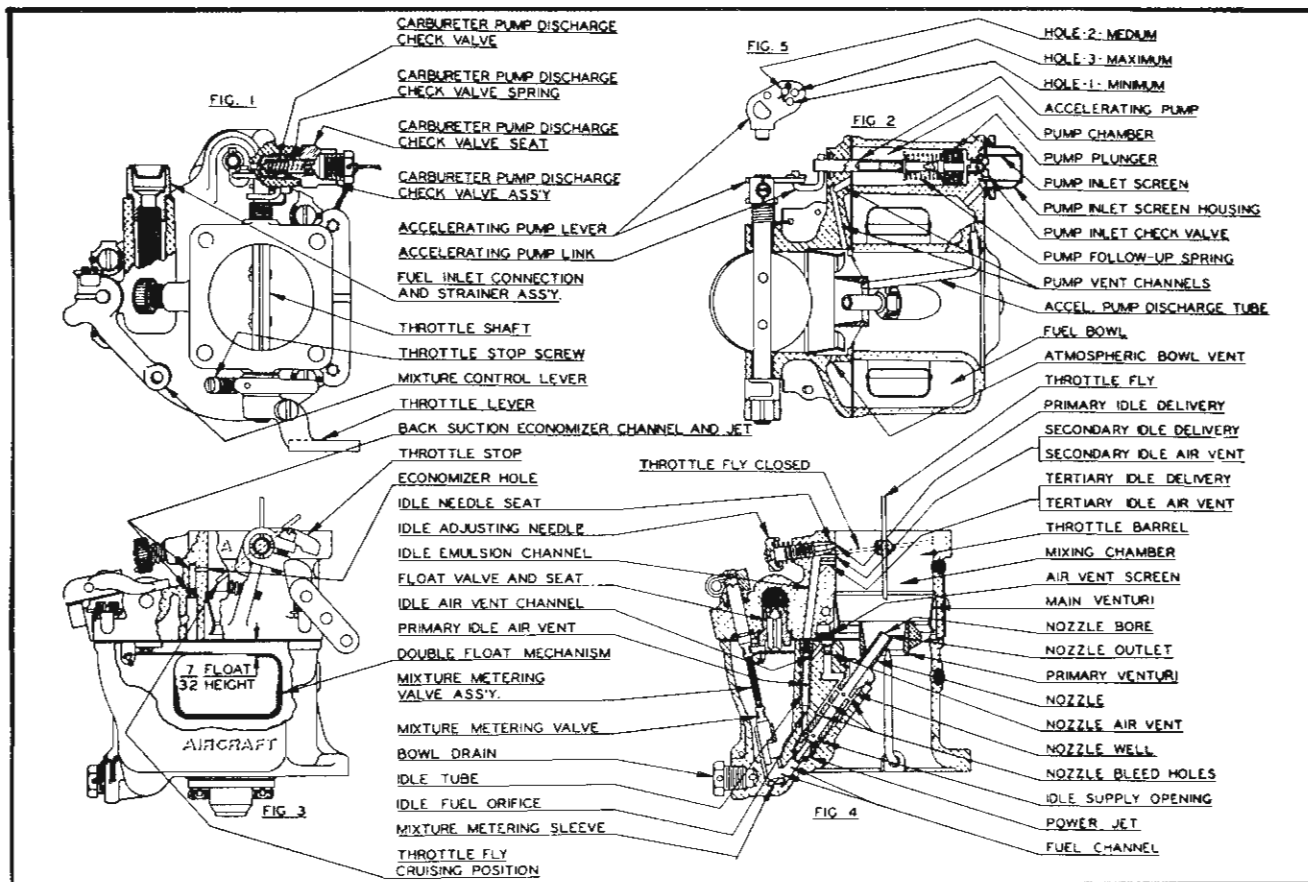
Schematic Drawing of the MA-3SPA Carburetor
